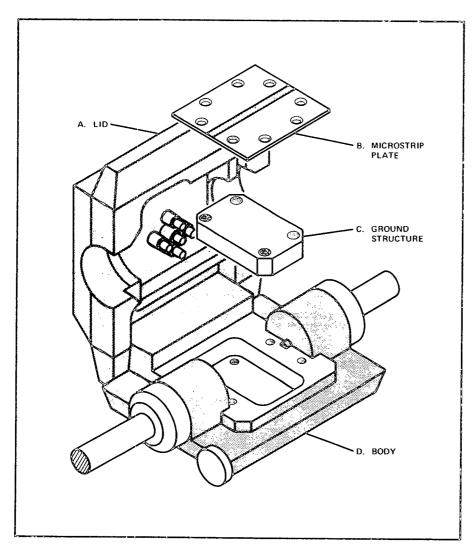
An Exploded View of the 11608A Test Fixture with Option 001
